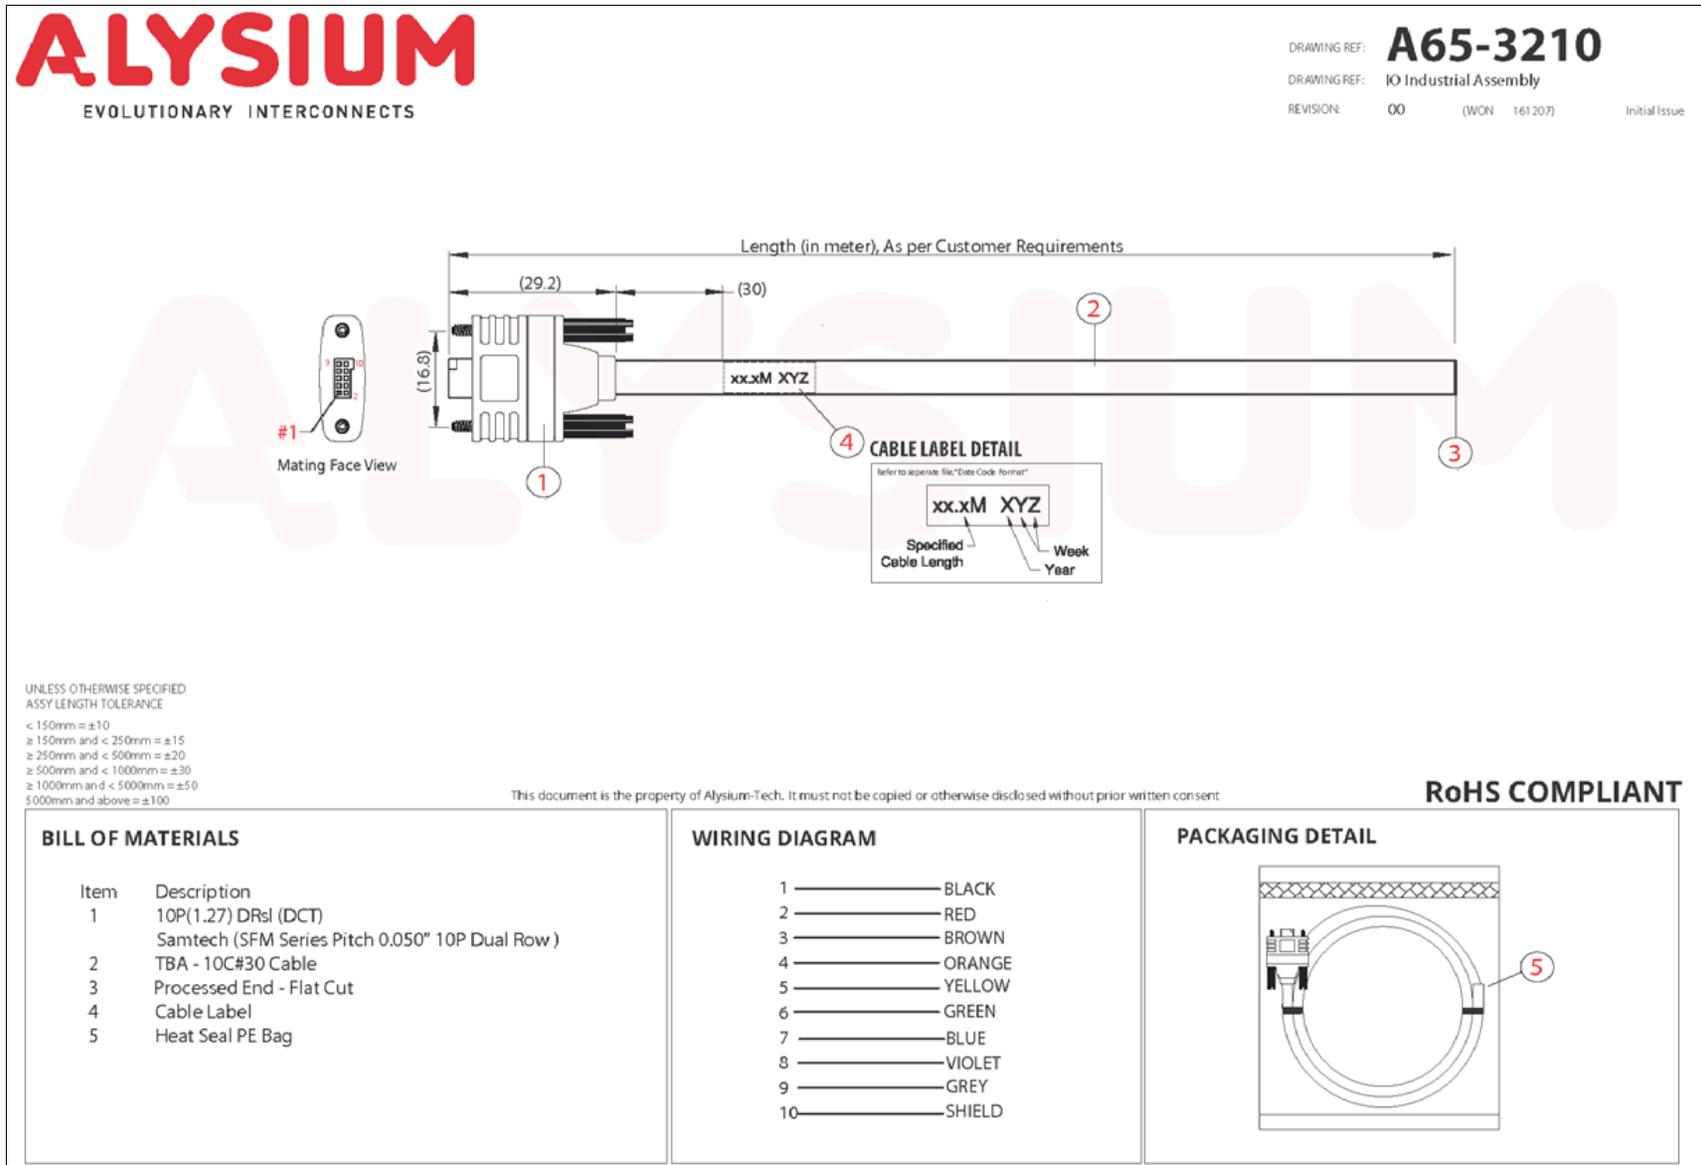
Cable Assembly G3-AIOC-BLUNT1M
